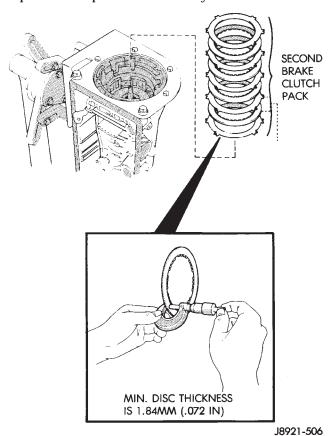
Removing/Measuring Second Brake Clutch Disc Thickness
